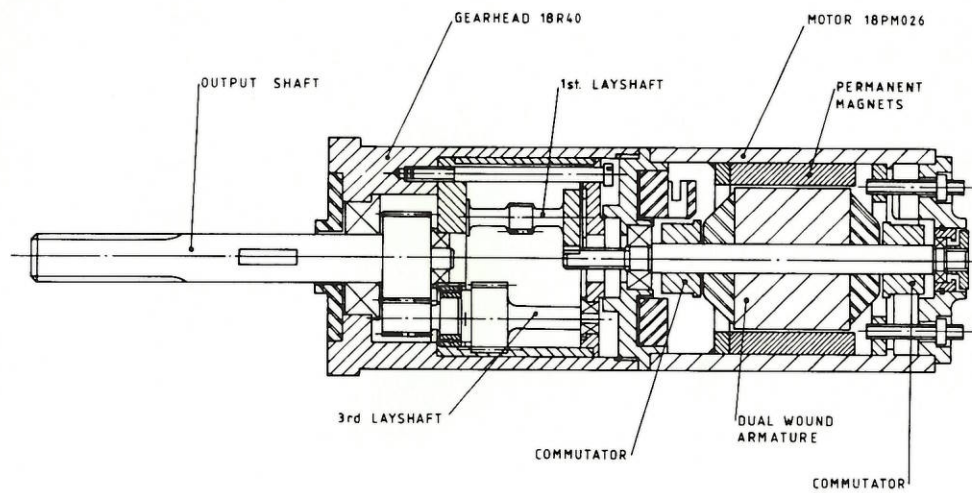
SECTION VIEW OF DUAL WOUND MOTORGearHEAD
